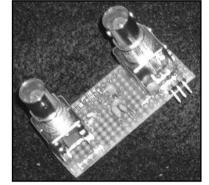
This photo shows the construction of the bridge-detector assembly.
